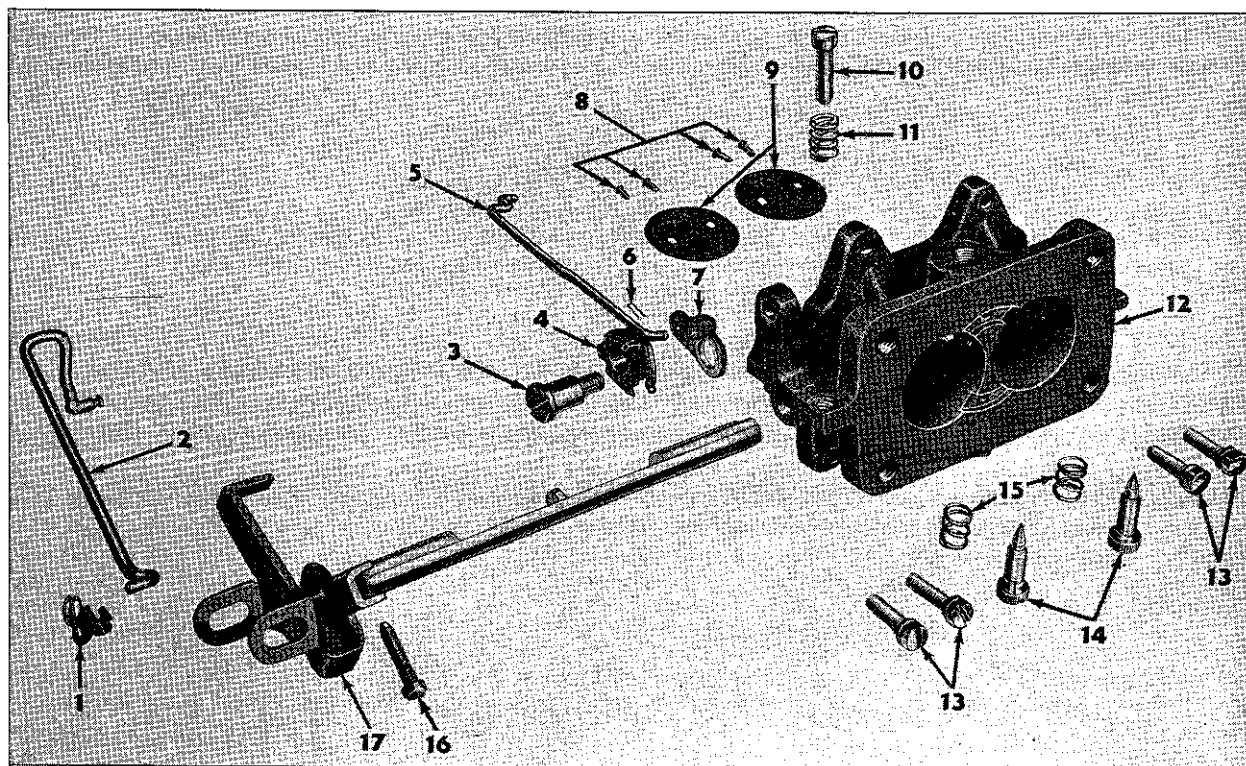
2204S BODY FLANGE AND ATTACHING PARTS
